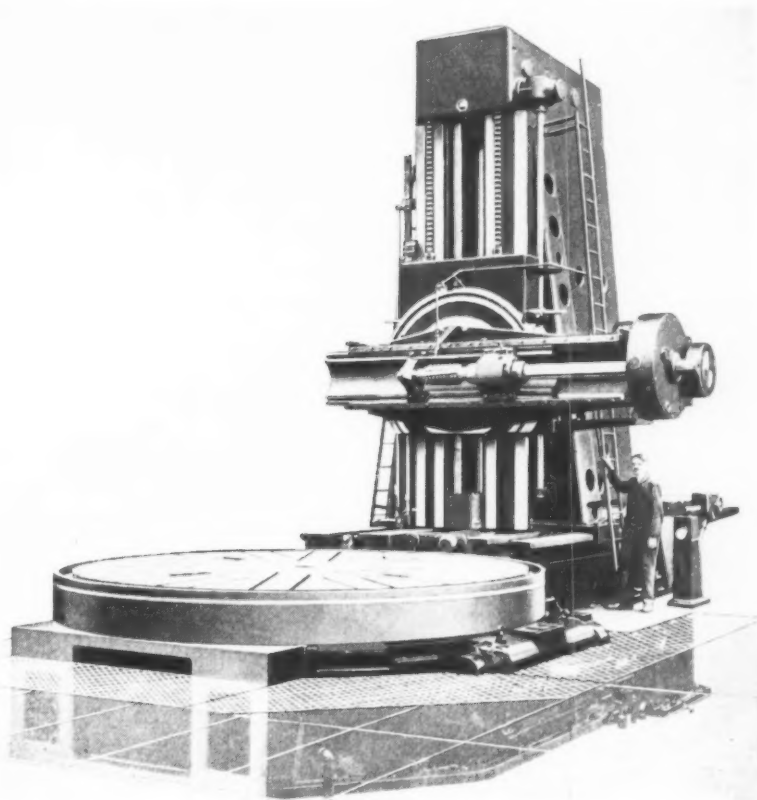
A Schiess-Defries Gear-hobbing Machine Capable of Cutting Gears up to 23 Feet in Diameter
